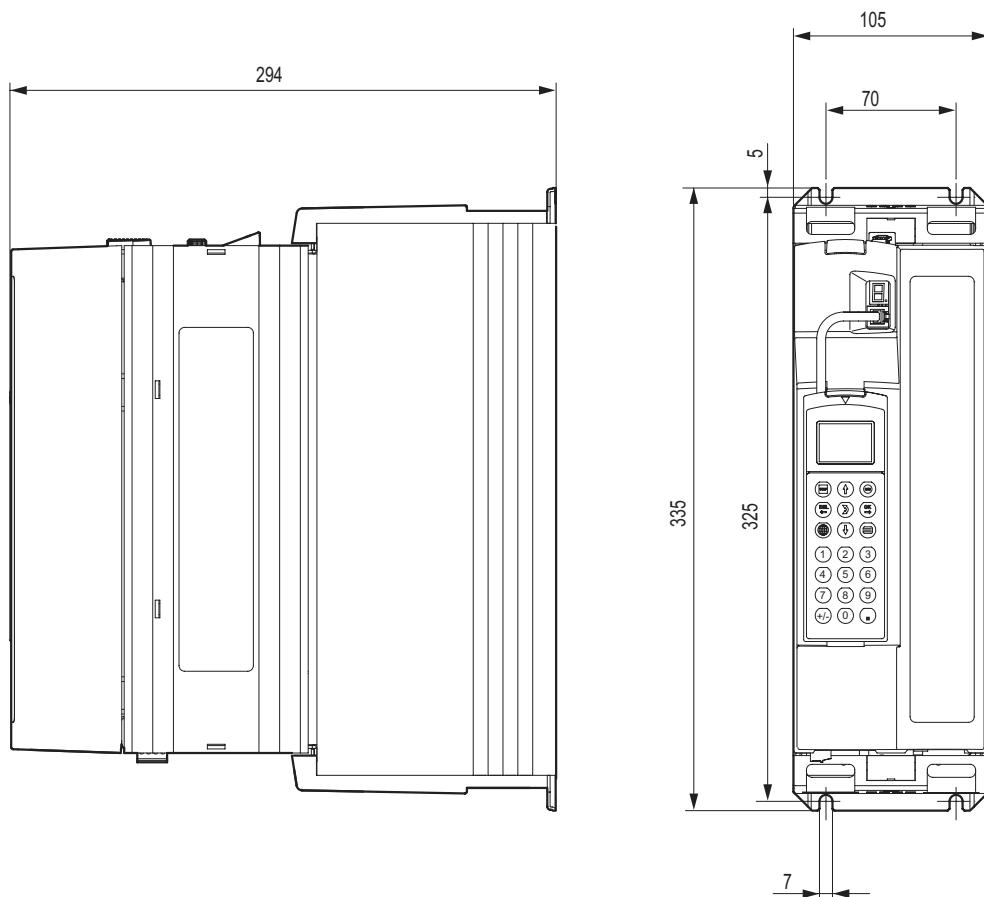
Dimension drawing for MDX61B size 1, dimensions in mm
